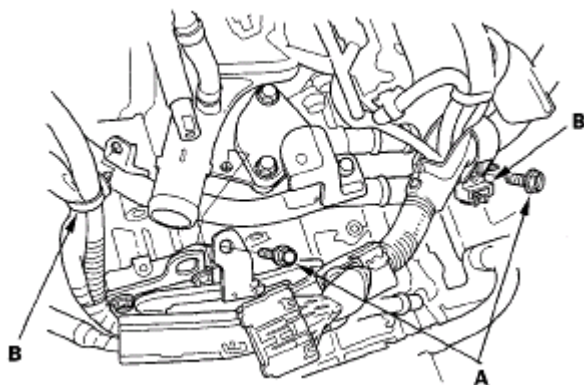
Identifying Engine Wire Harness Bracket Mount Bolts And Harness Clamps
